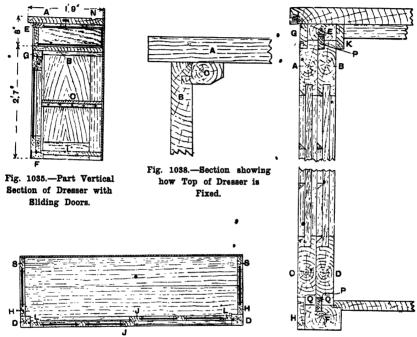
Horizontal Section through Dresser with Sliding Doors.
